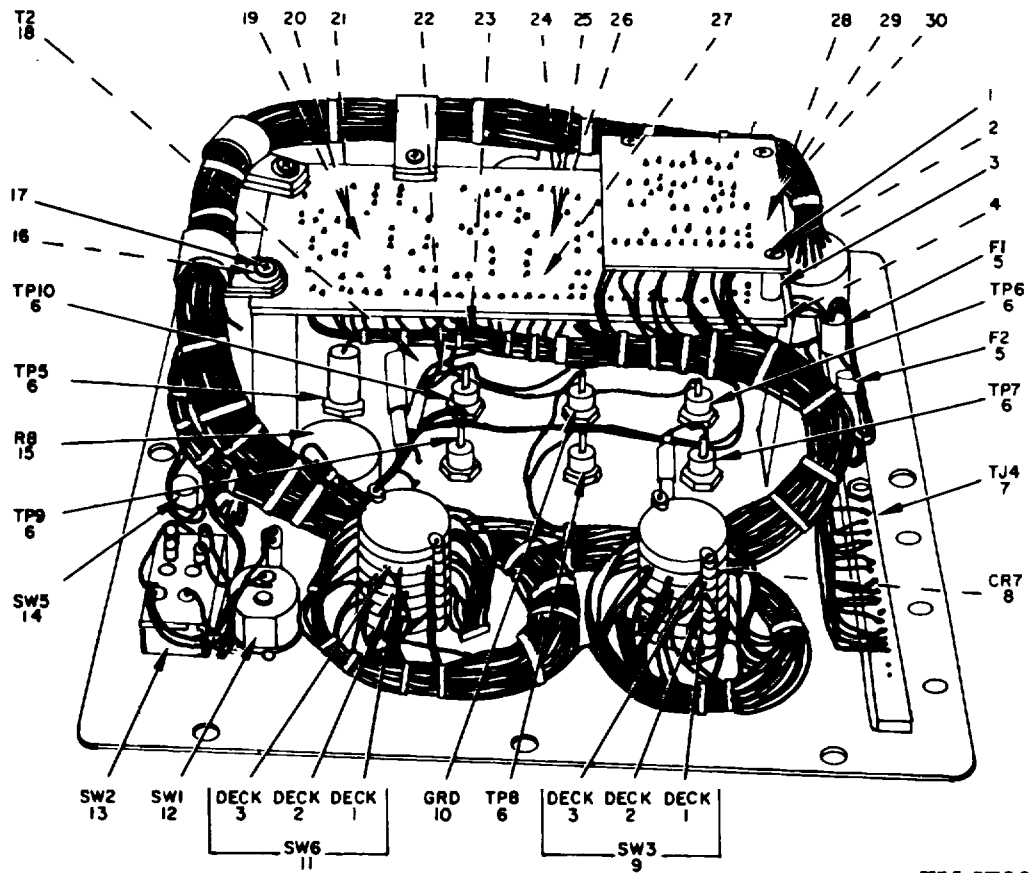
Test Set, Electronic System TS2676/ASM338, panel assembly.
